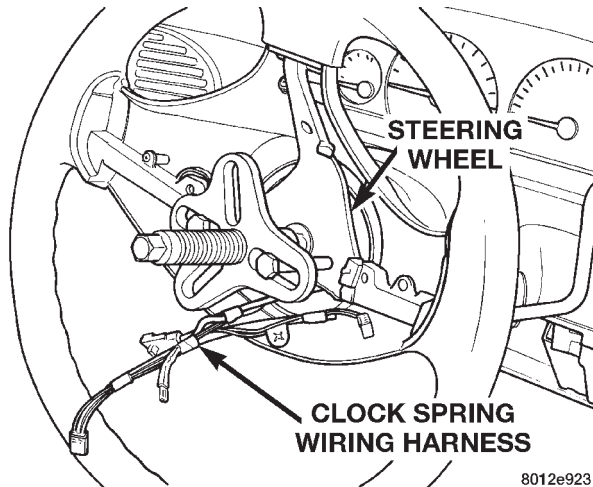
Removing Steering Wheel From Steering Column Shaft
